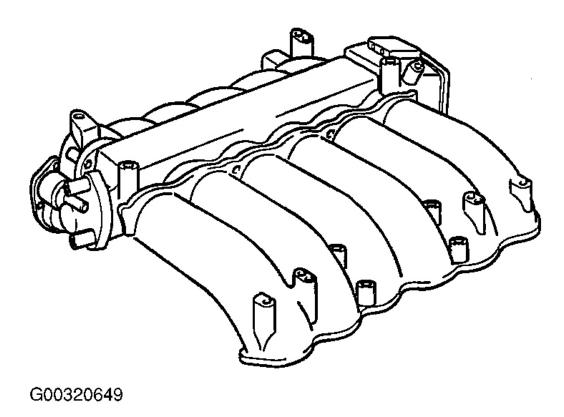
Removing The Surge Tank Courtesy of KIA MOTORS AMERICA, INC.
